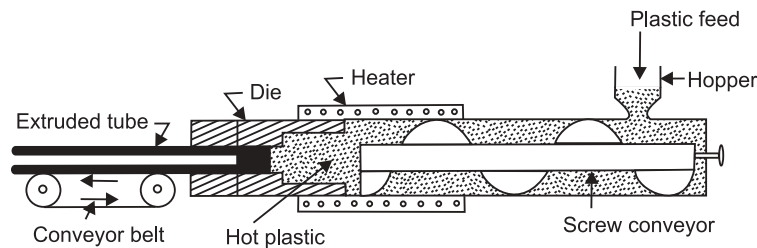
Moulding of Tube by Horizontal Extrusion Moulding
